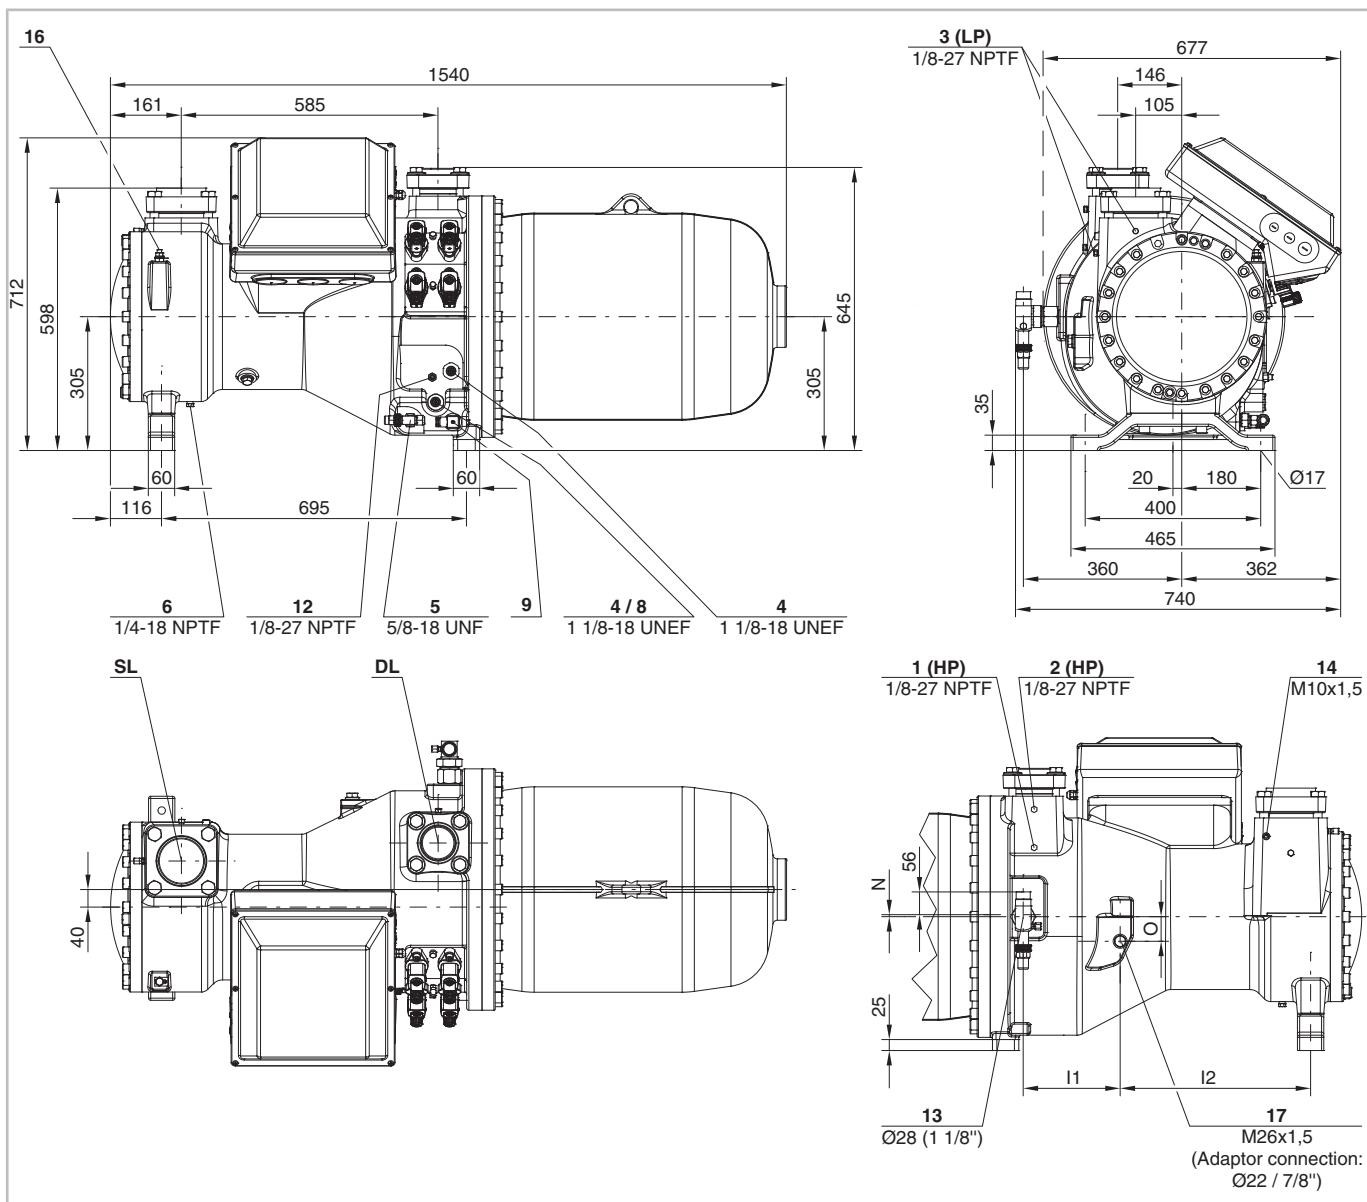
Dimensional drawing CSW8573-90Y .. CSW8593-140(Y)
